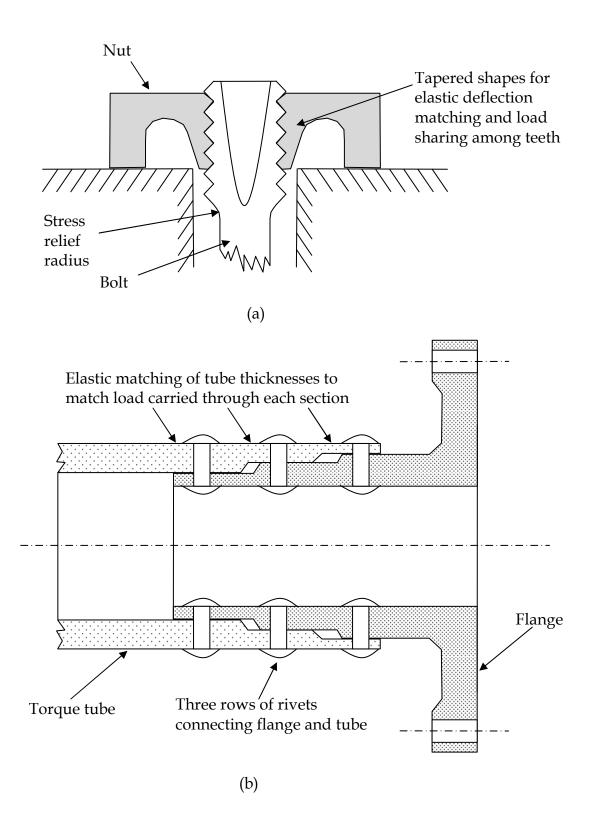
Elastic matching in: (a) bolted and nut, and (b) riveted joint.
